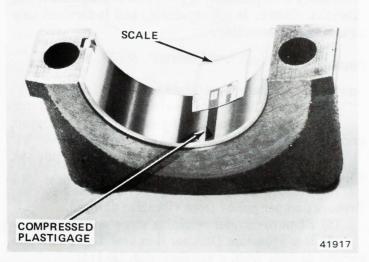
B-172 Checking Main Bearing Clearance with Plastigage
